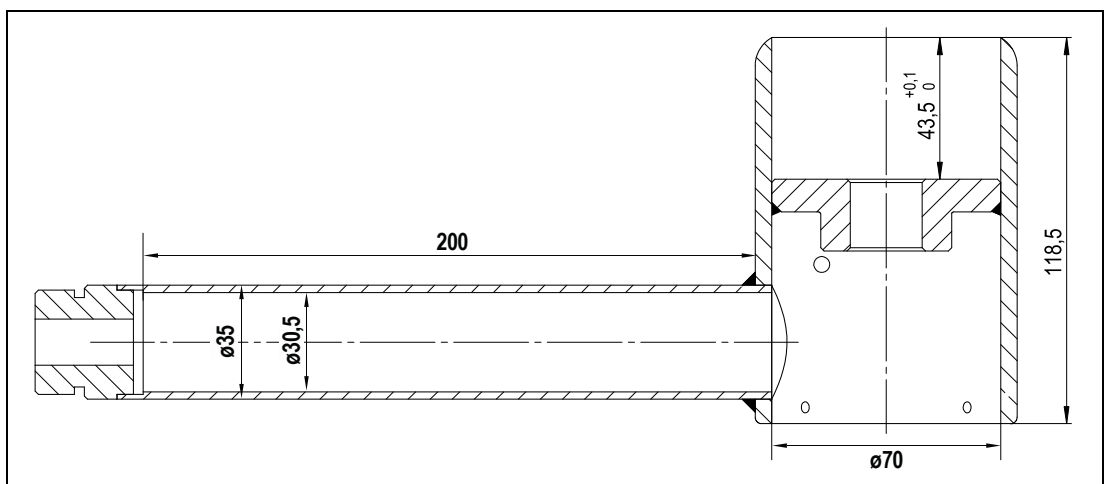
Dimensions rod sensor, type NOS-V40
